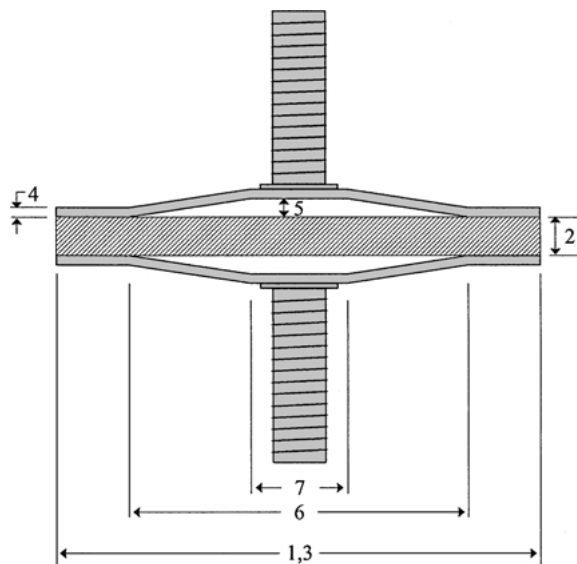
Cross-sectional schematic of a cymbal element with threaded studs. Dimensions are provided in Table 1.
